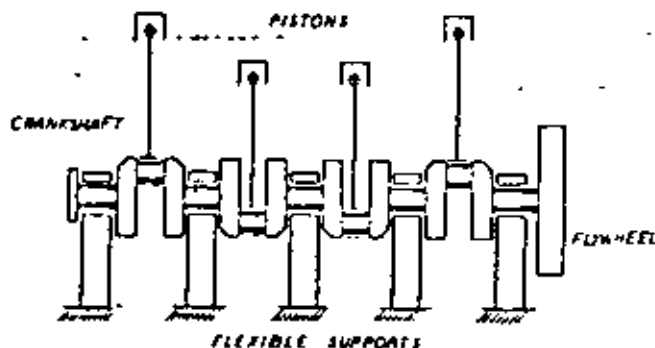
A Typical Crankshaft-Bearing System on Flexible Supports
